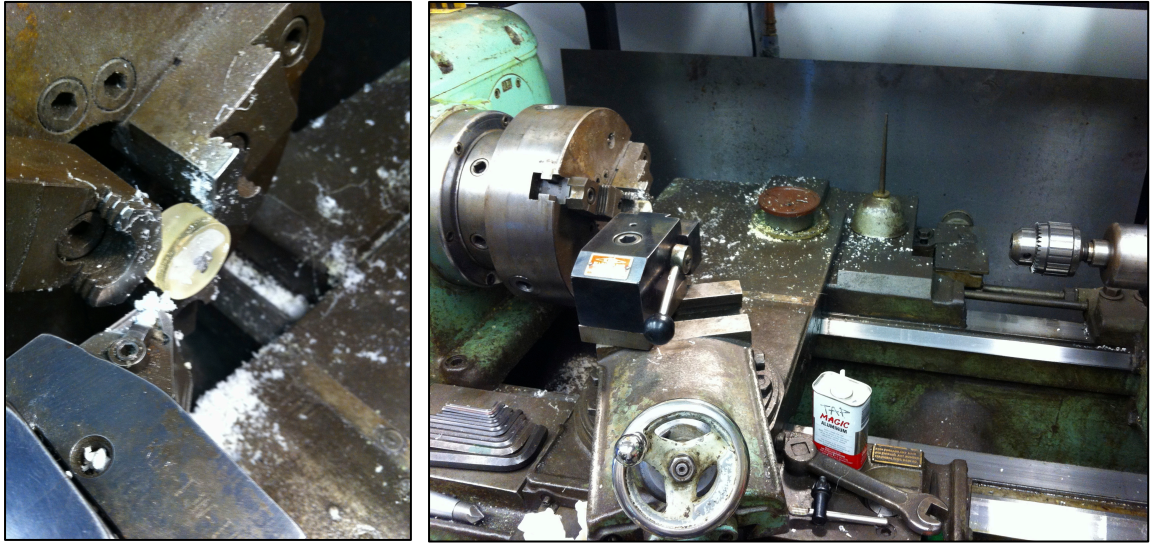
An epoxy sample sitting in the chuck of a lathe being cut down till all bones are exposed on the testing surface side.
